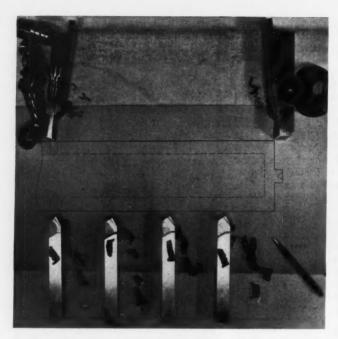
Tools arranged on drawing to show location of turning, facing, and cutting off tools used in machining of 5-in. diameter SAE 1045 steel shells.
